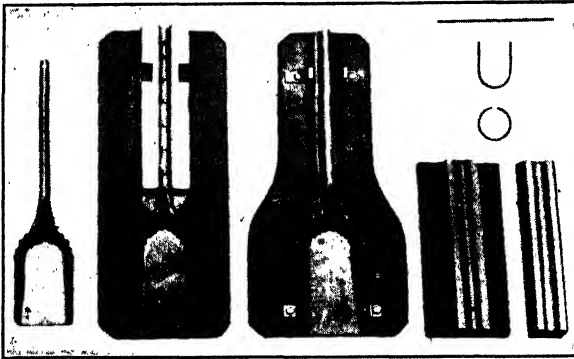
Stamping a shovel and U-ing the handle in one step, then closing the handle in a second step.
